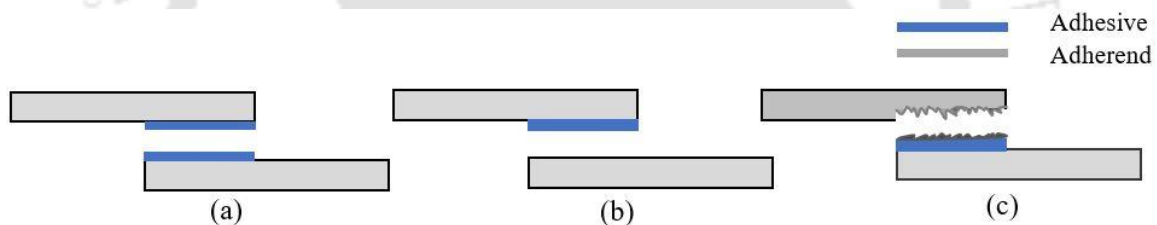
Failure modes in bonded joints (a) Cohesive failure, (b) Adhesive failure, and (c) Adherend failure
